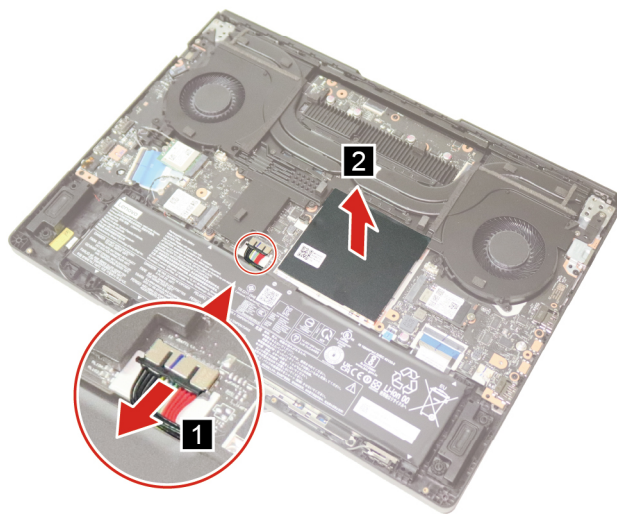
Disconnect the battery pack cable and remove the memory module shielding
